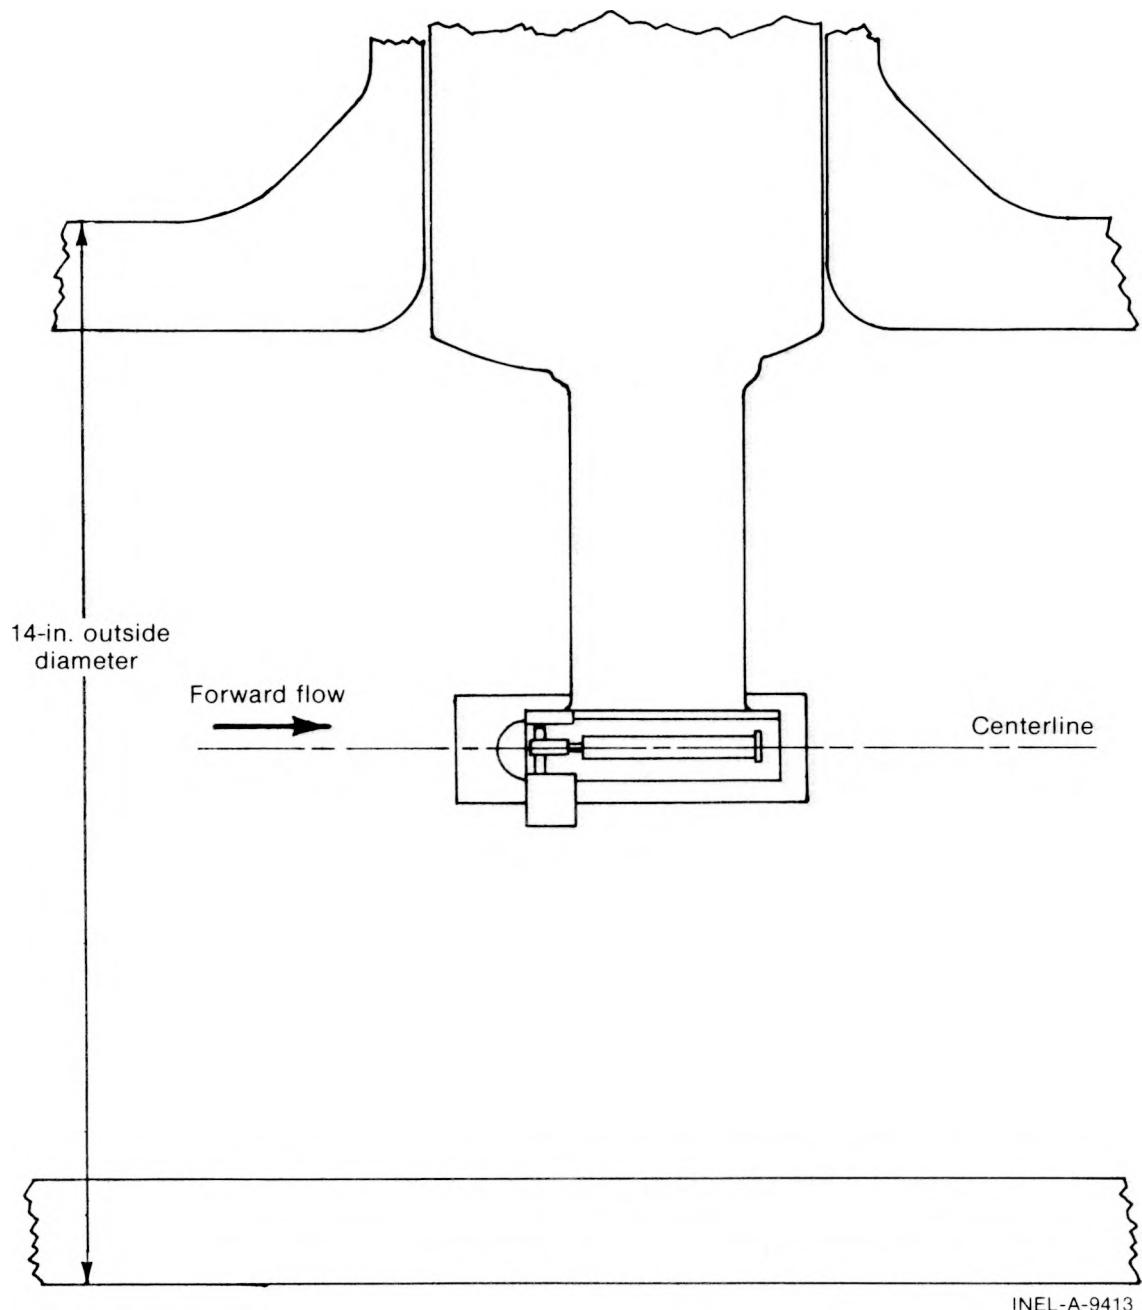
Schematic - piping instrument flange showing the DTT location in the pipe.
